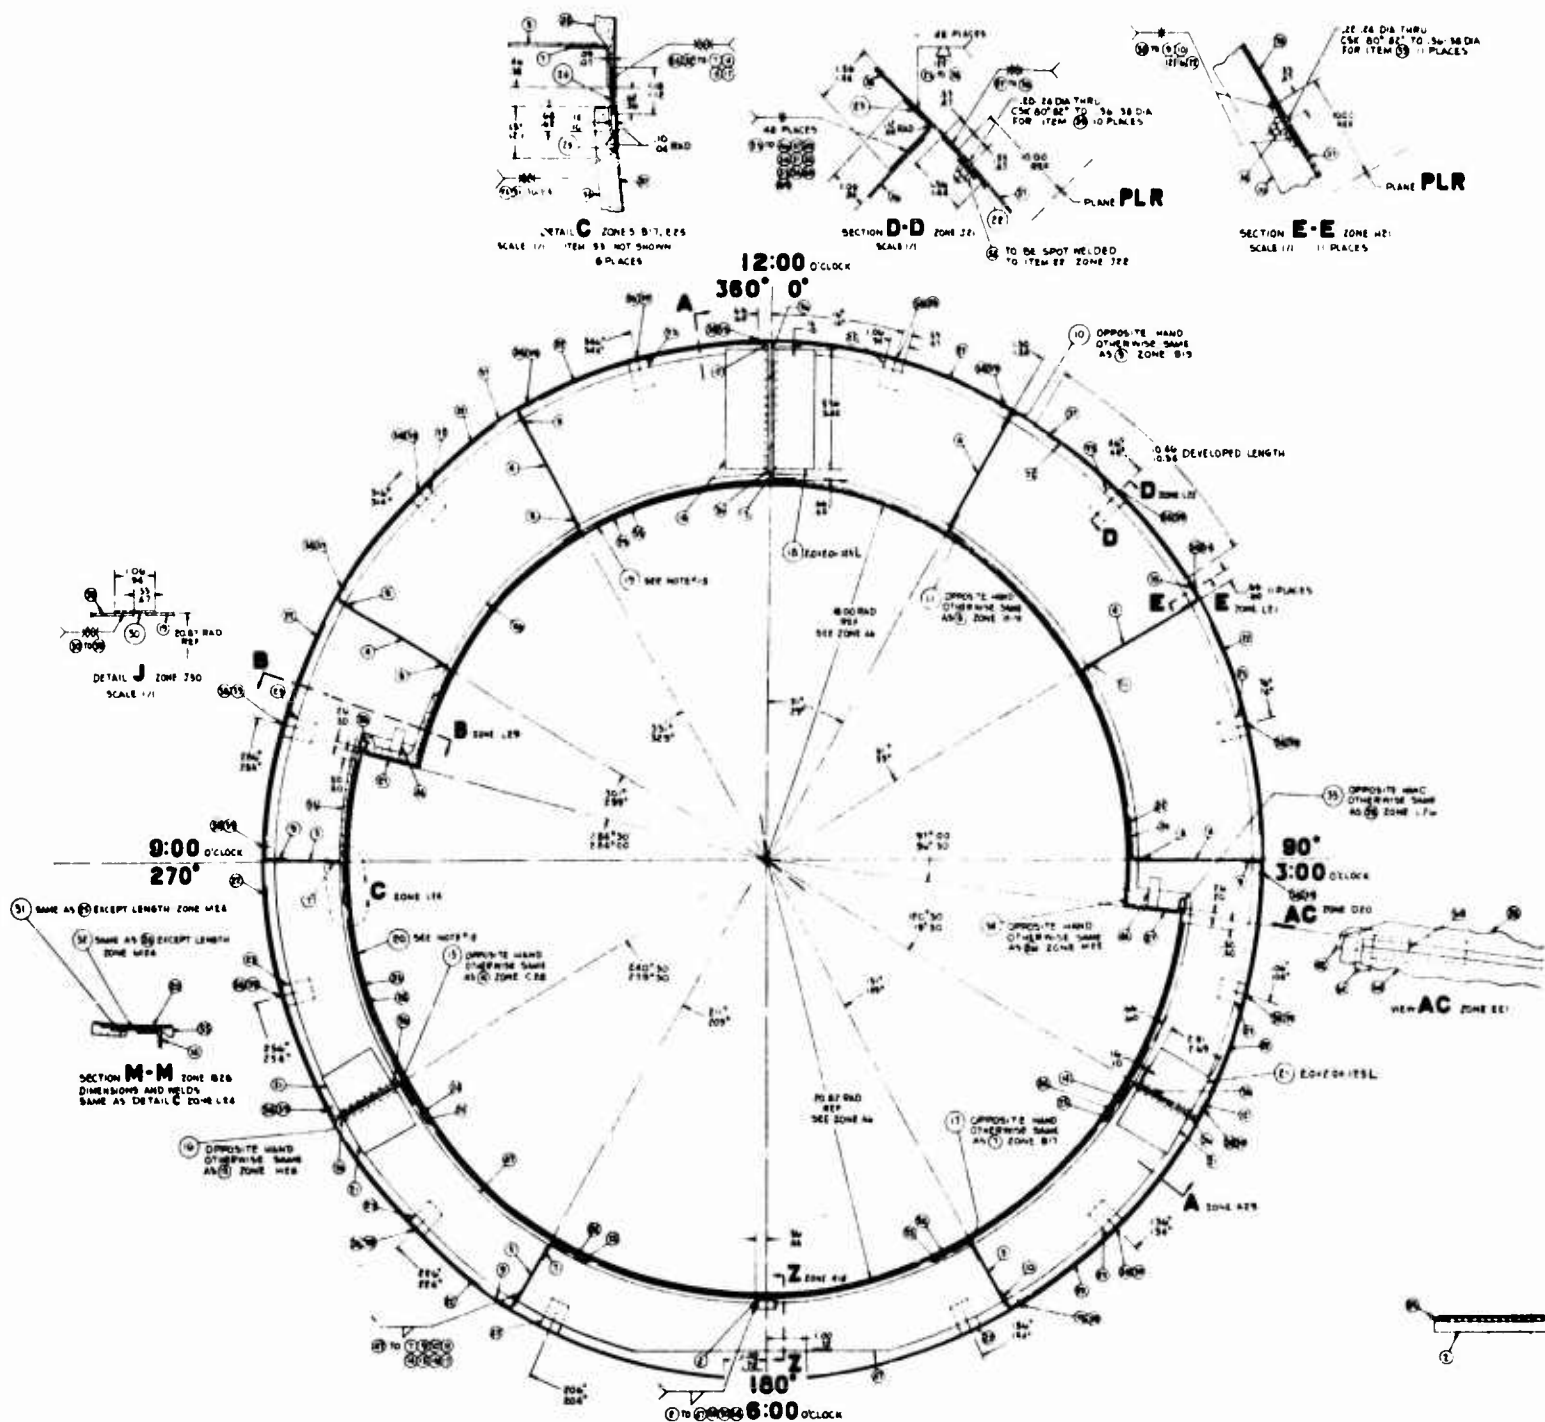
Detail Drawing of Aft Nacelle 1 (Co
